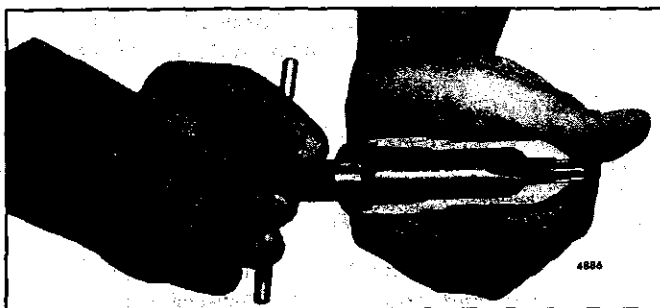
Cleaning Injector Nut Spray Tip Seat Using
